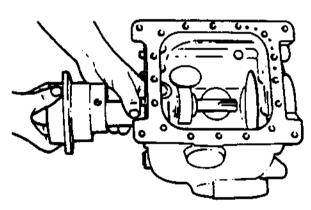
Removing or Replacing Crankshaft and Pump End Bearing Head
